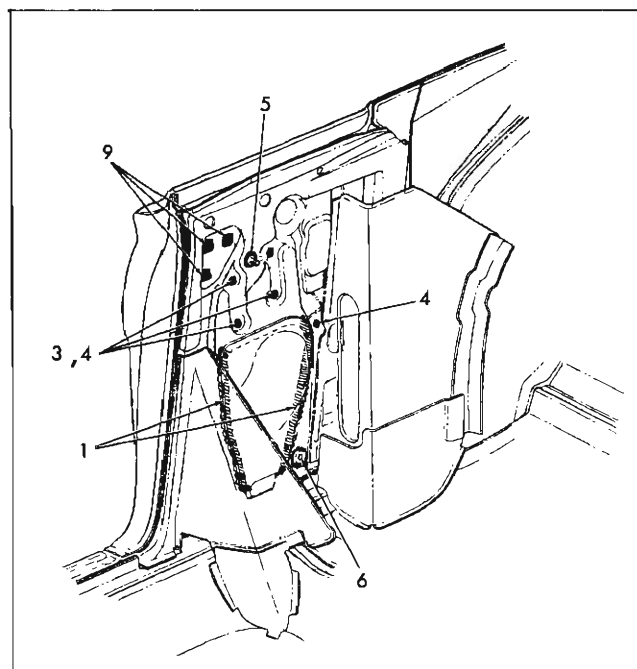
Rear Quarter Inner Panel Sealing—67 Styles
